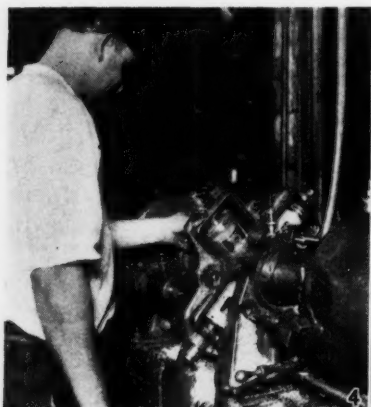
Boring and reaming wrist pin holes, using a horizontal machine with an indexing fixture. Fig. 5—Finish-grooving in a "Multi-Cut" lathe. An air-operated tailstock center speeds up this operation. Fig. 6—Drilling oil drain holes in the skirt of the piston.
